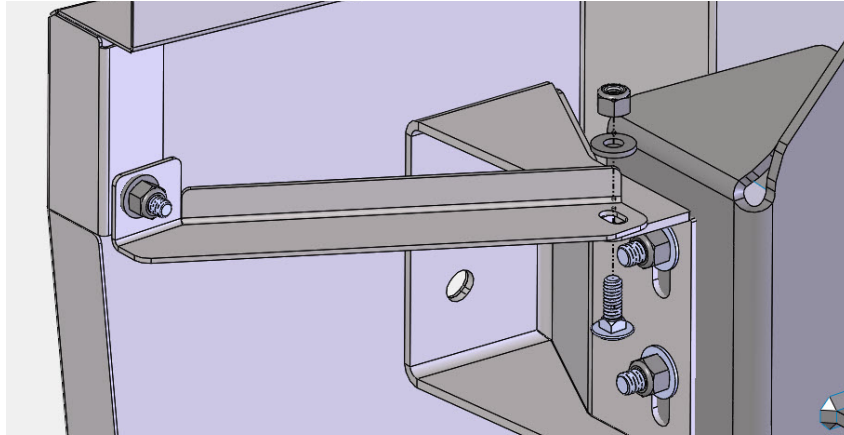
Fastening the Stiffener Bracket to the HEP (Driver Side Shown)
